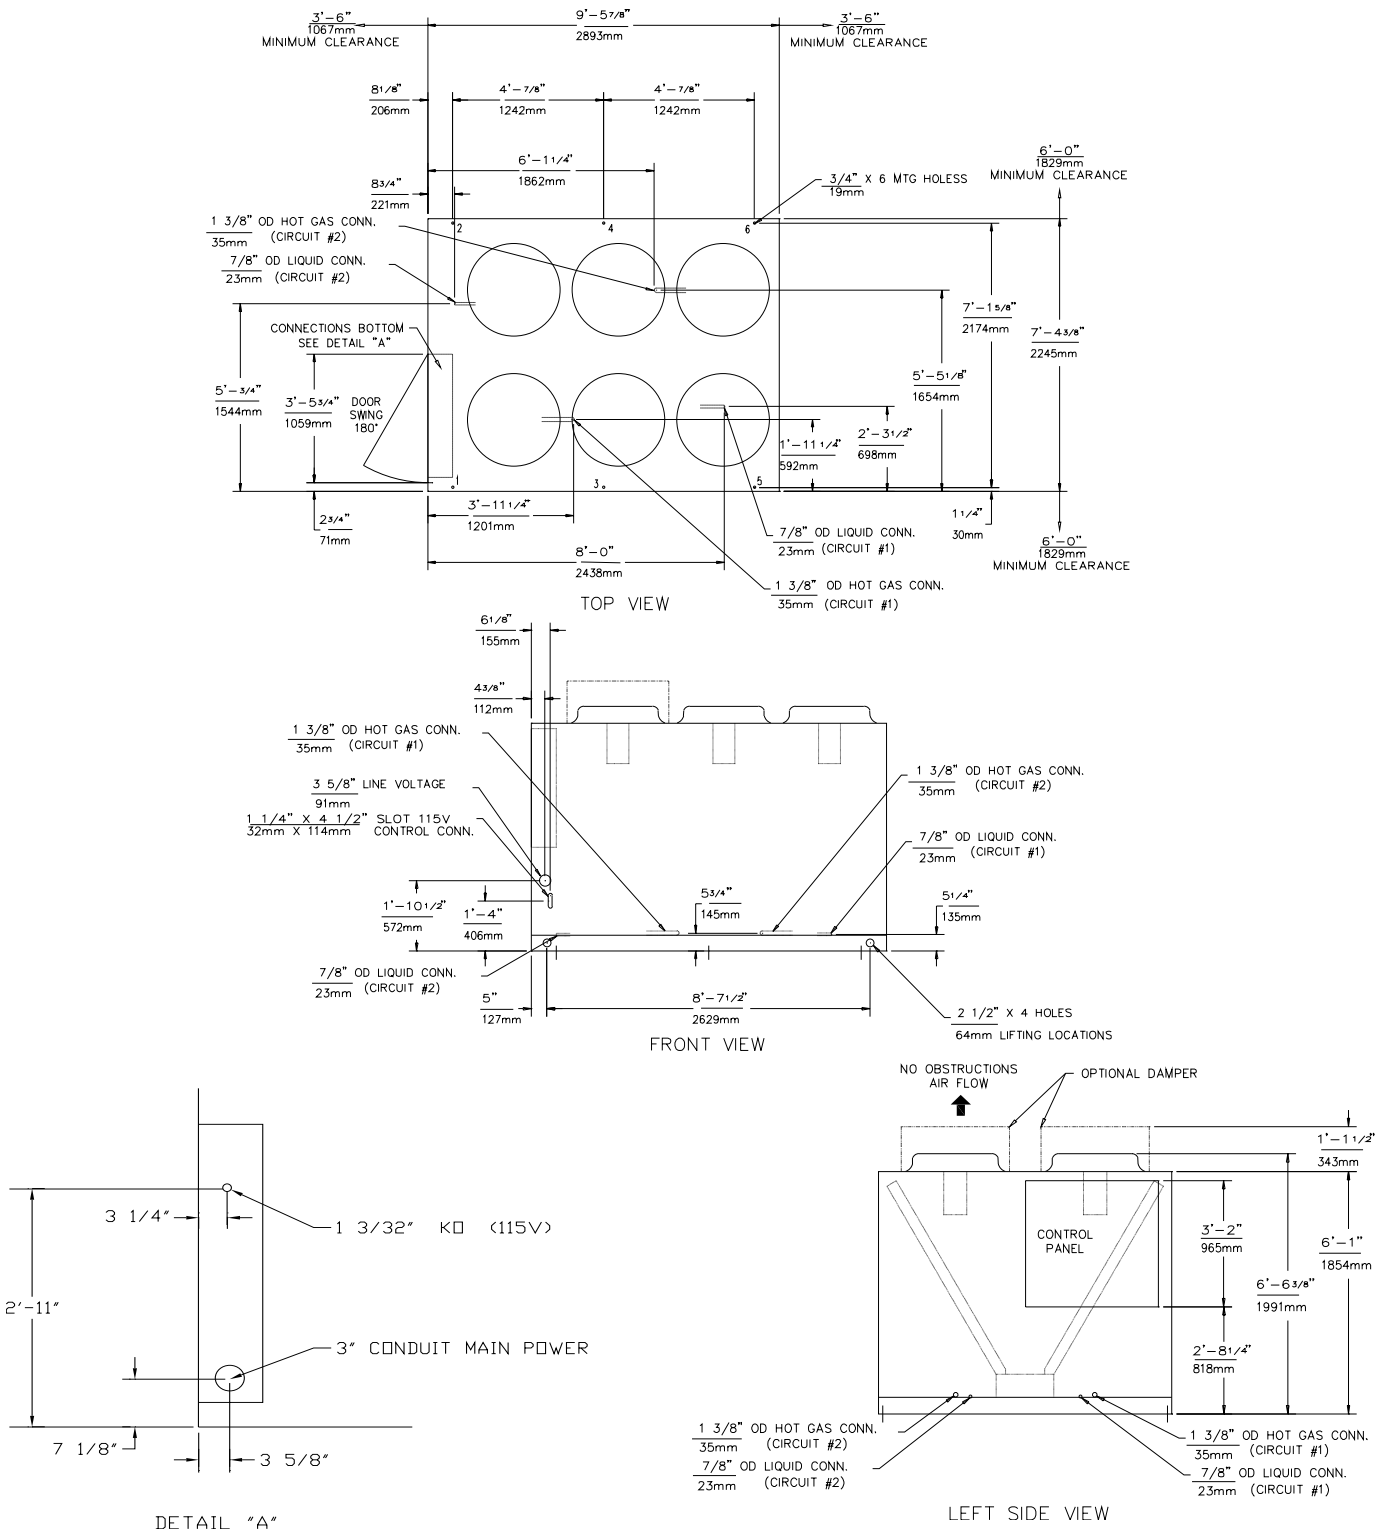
CAUC-C50 Unit Dimensions, Recommended Clearances, Mounting Locations, Electric and Refrigerant Connection Sizes and Locations
